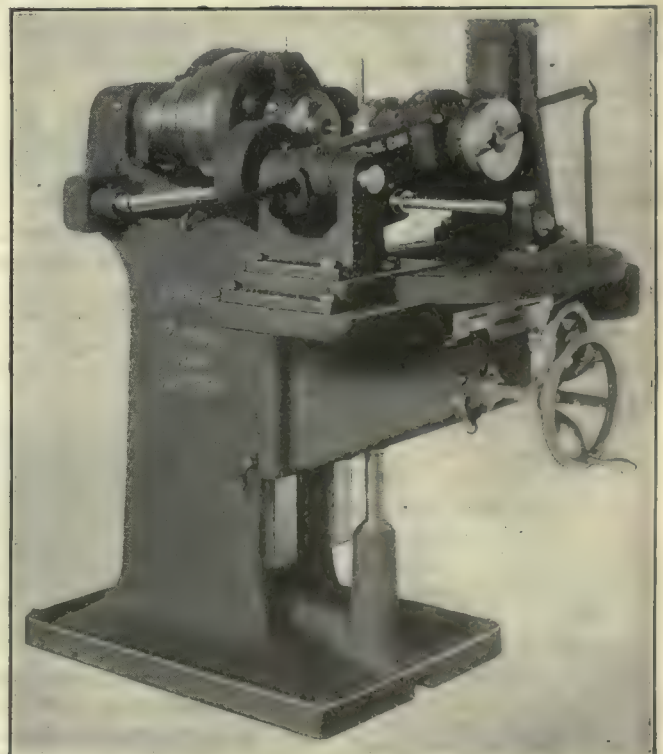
GARVIN CAM MILLING MACHINE SET UP FOR FLAT CAMS
